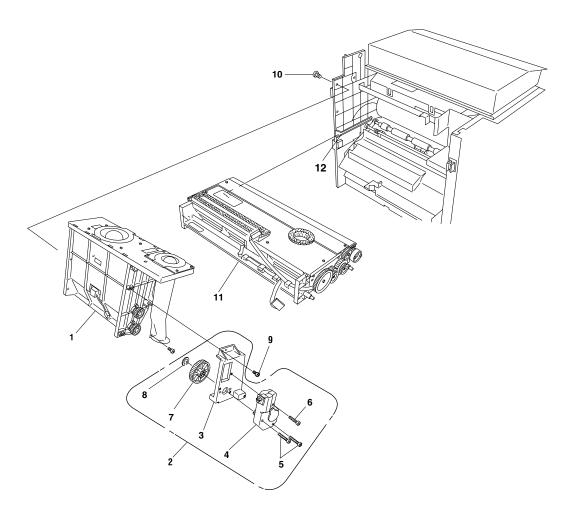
Toner Hopper and Developer Units Parts Locational Diagram
